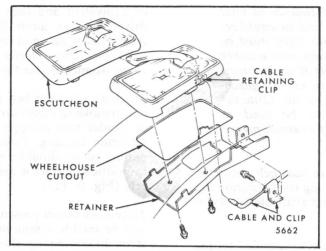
Third Seat Back Lock Remote Control Handle
